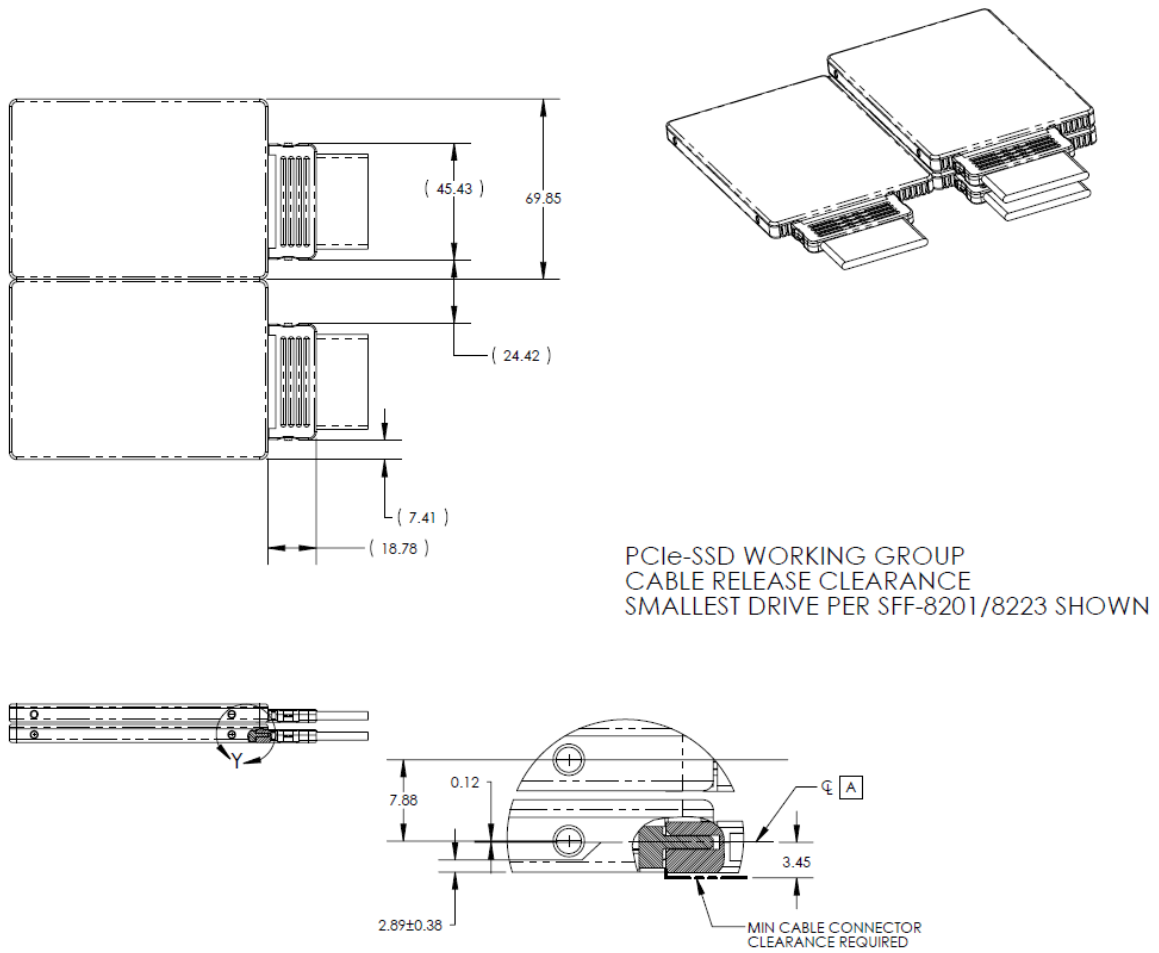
Cable Retention Mechanical Drawing – Representative Cable Housing
